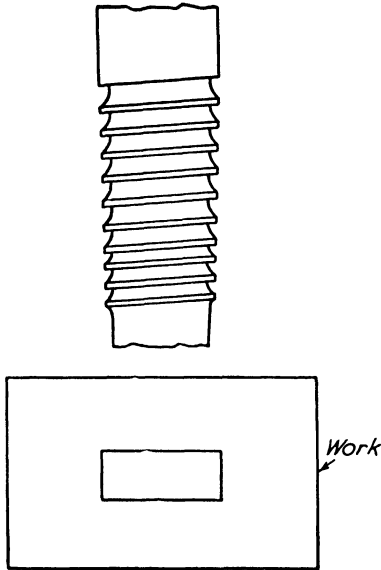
Teeth on a broach for enlarging square or rectangular holes should be slanted in opposite directions on reverse sides of the tool to provide balanced shearing cuts, which tend to prevent side thrusts.
